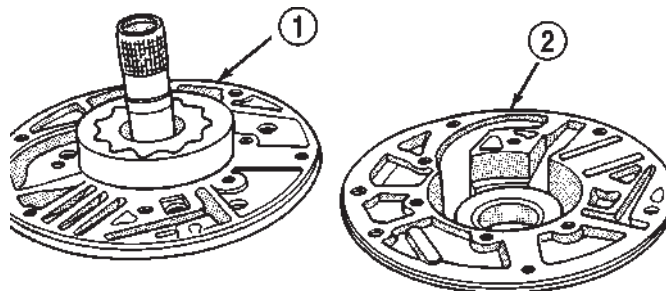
Separating Pump Housing From Reaction Shaft Support
